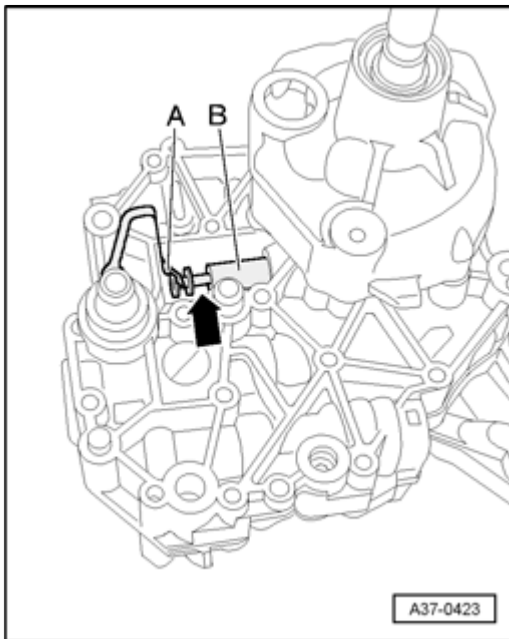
Pressing Control Piston On Rear Side Of Hydraulic Control Module Completely Inward Until It Engages Into Assembly Spring
